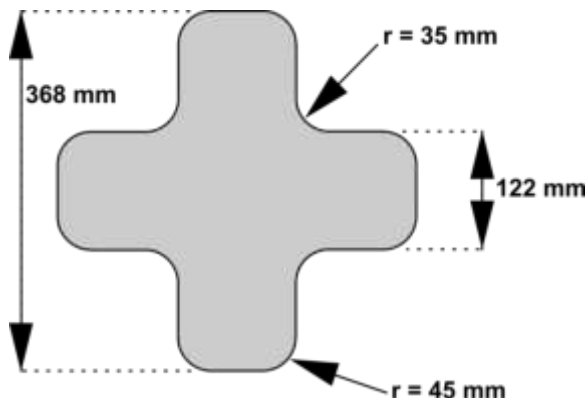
The cross-shaped die used to stamp the blanks is shown by a schematic drawing.
